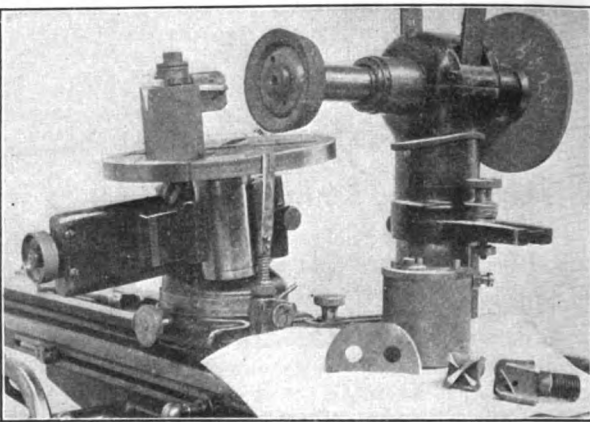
GRINDING FORMED CUTTERS WITH SIMPLE FIXTURES
